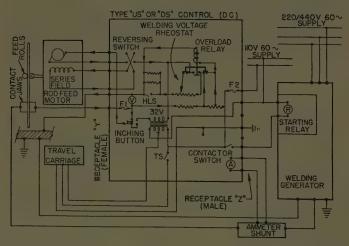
The circuit diagram for series control shows that the leads across the welding zone are connected directly to the rod-feed motor through a rheostat
